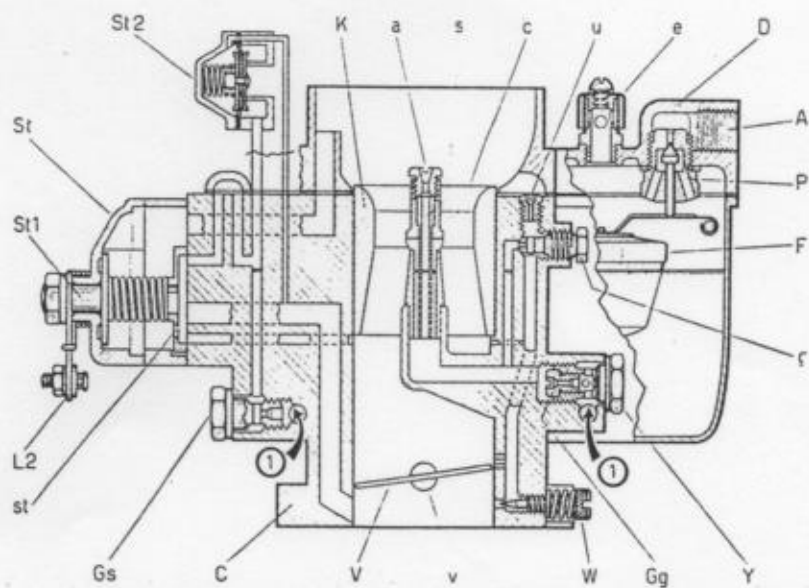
Solex Type 40 ICB Carburettor – Sectional Schematic
